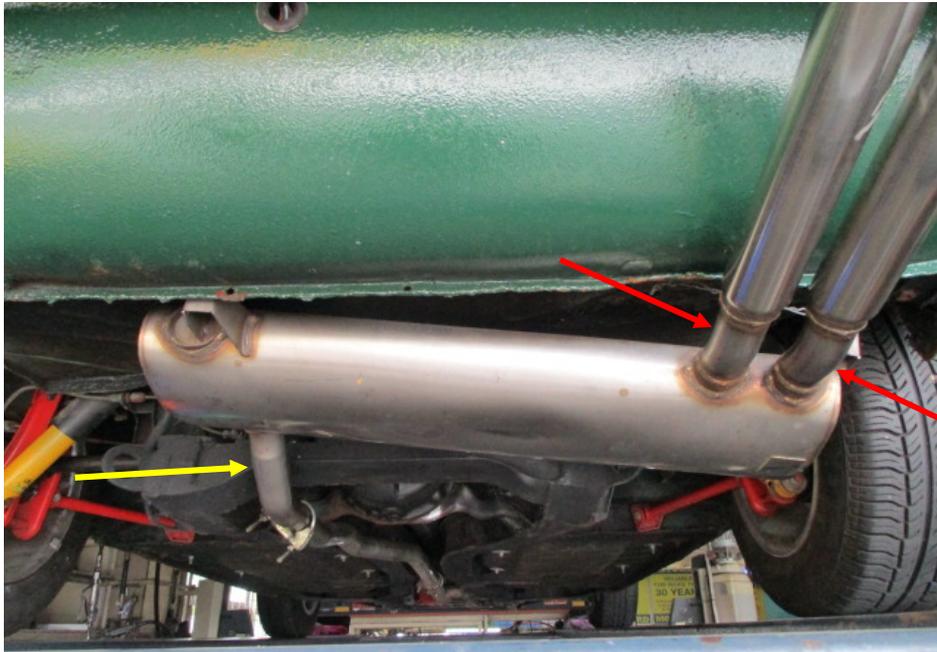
shows a general view of the rear exhaust muffler that was fitted on the Motor Car. The Motor Car's rear exhaust muffler was fitted with 2 exhaust end pipes (red arrow) and a single exhaust pipe (yellow arrow) that connects to the centre exhaust pipe. Welding marks were seen surrounding the area where these pipes join the rear exhaust muffler.
